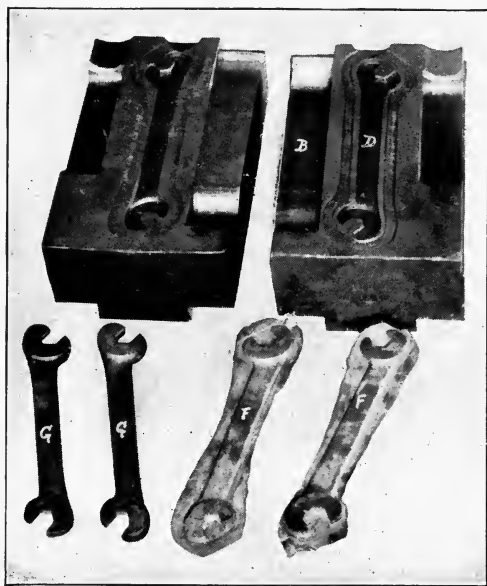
Drop-Forging Dies and Specimens of Work.
